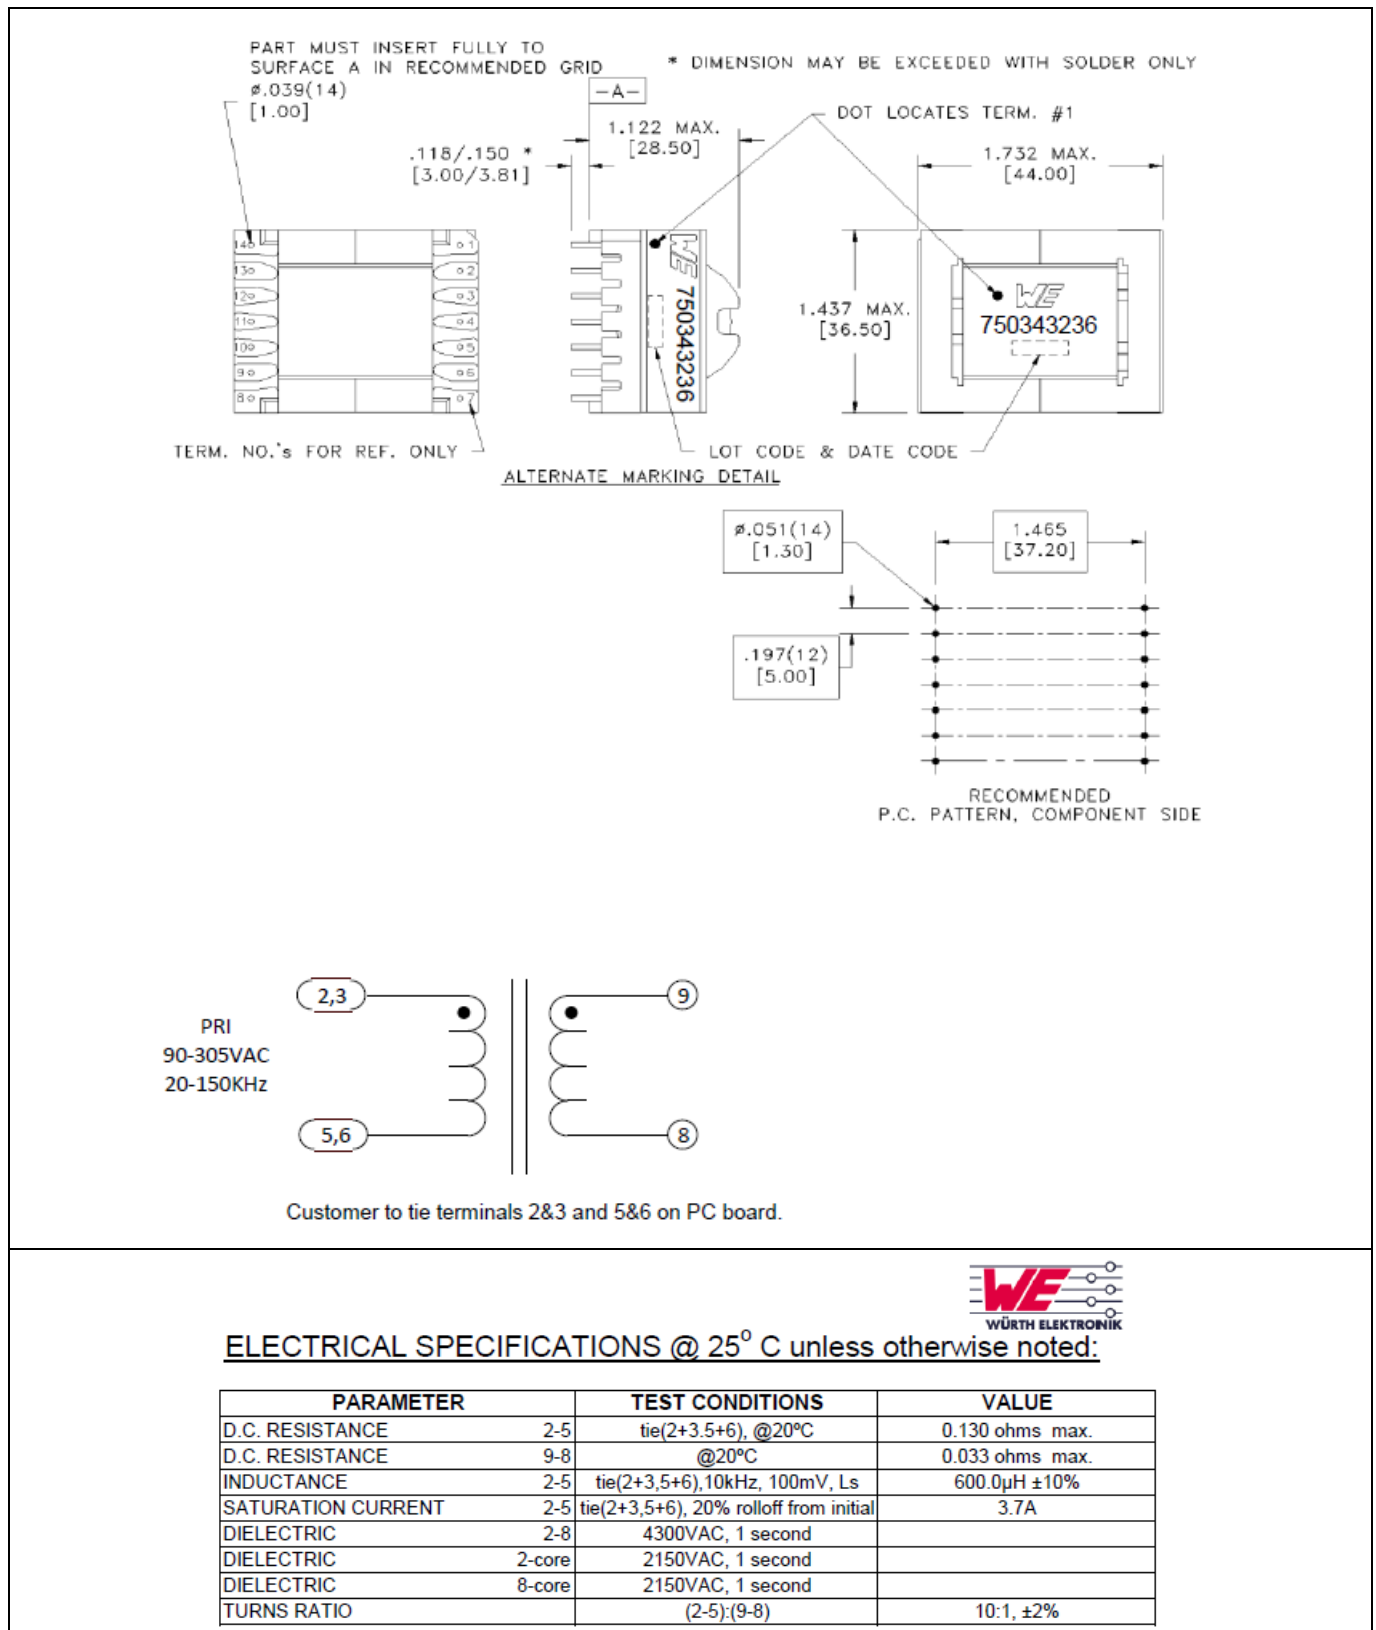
Würth Elektronik PFC choke 750343236 rev00 specification
